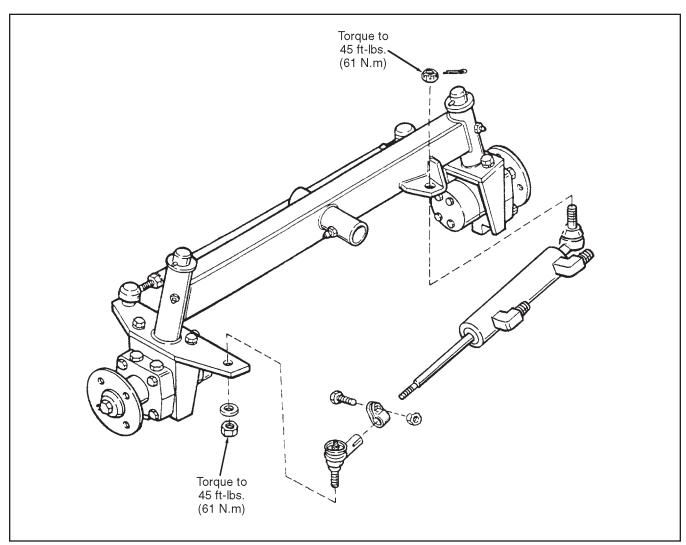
E-2. 4 Wheel Drive Steering Cylinder Removal/Installation
